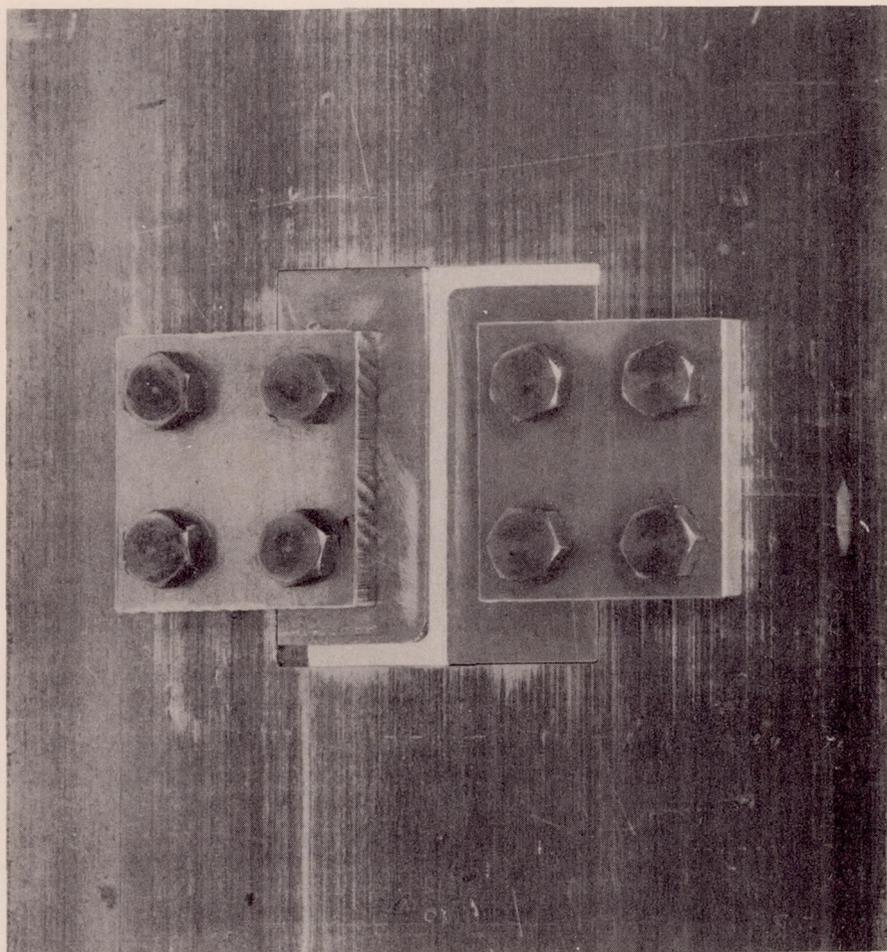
Bracket for supporting end of specimen without restraint against warping, outside face.
